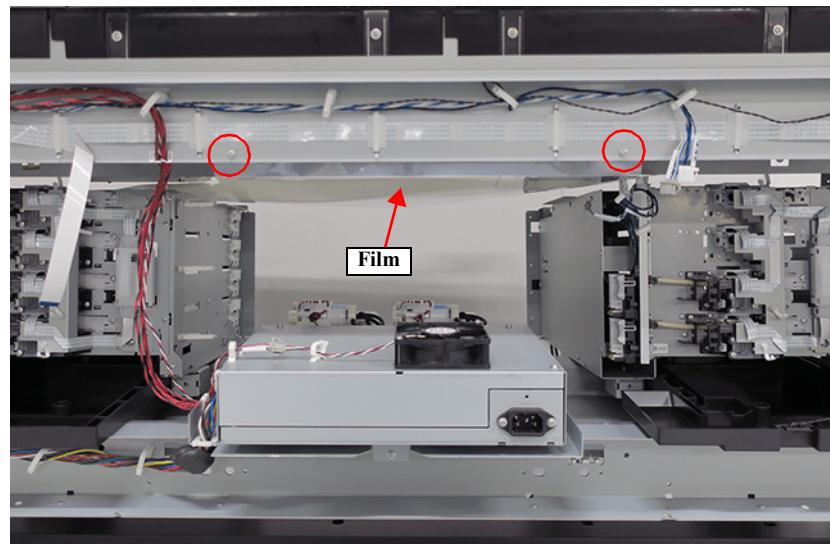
Removing the PF ROLLER MIDDLE SUPPORT (2)
